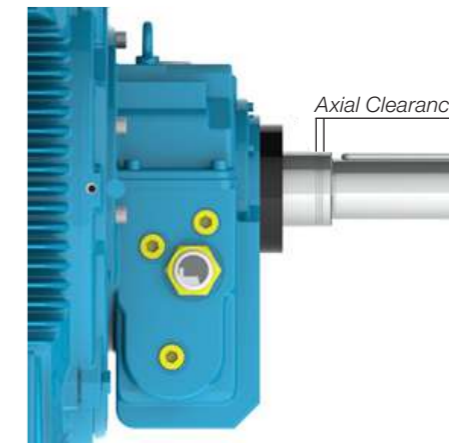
Axial clearance of motor designed with sleeve bearing
